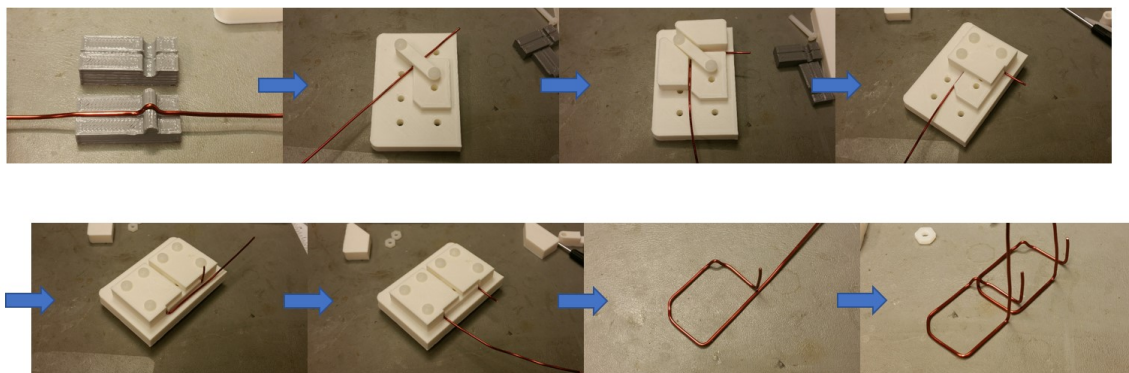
Example of constructing a butterfly coil array using coil shaping tools. One side of the butterfly coils are demonstrated here.
